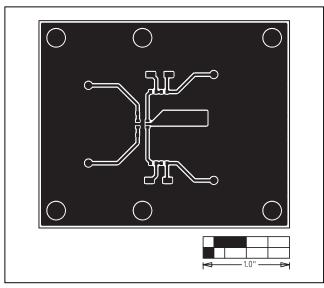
MAX9583 EV Kit PCB Layout—Component Side
